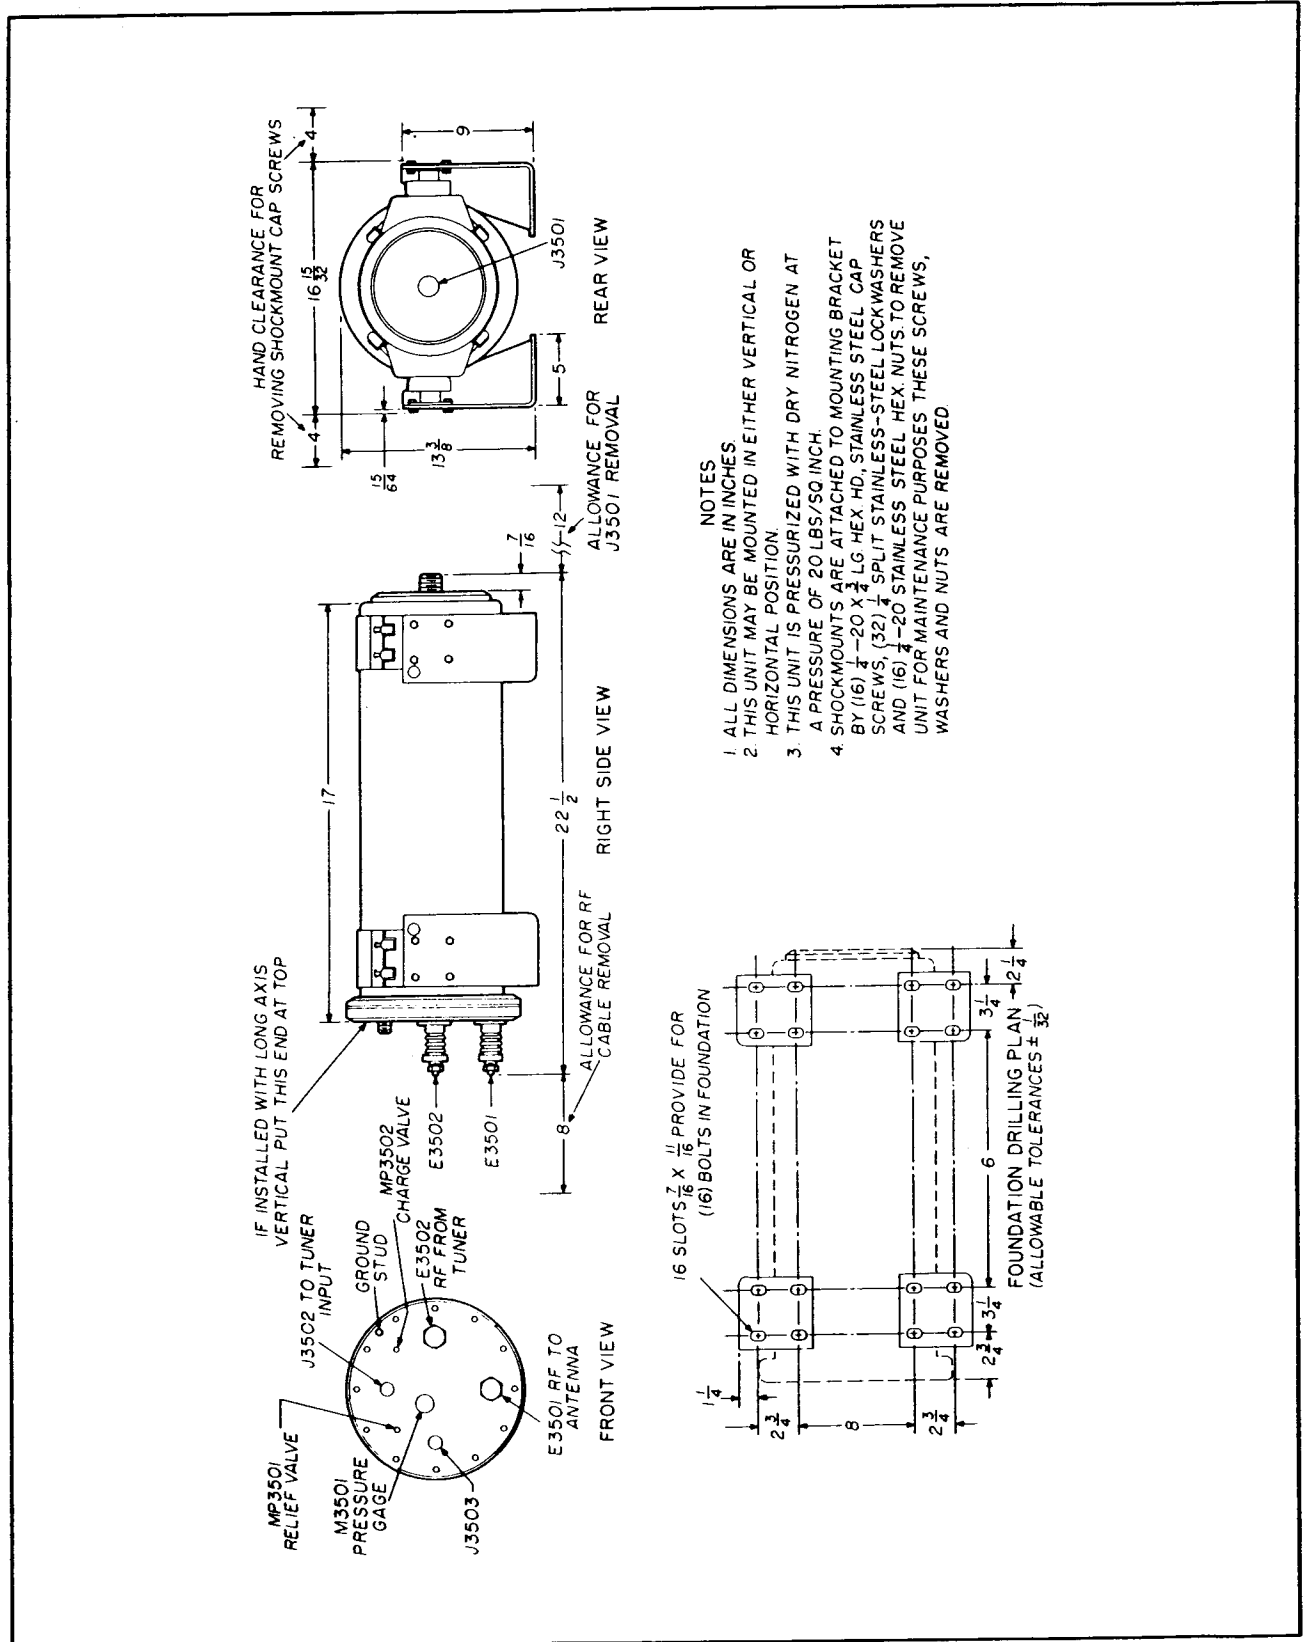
Antenna Coupler CU-760/WRT-1, Outline Drawing
